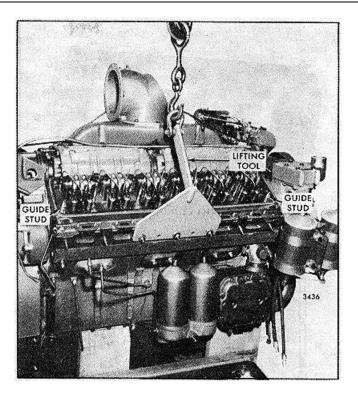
Removing or Installing Cylinder Head with Tool J 22062-01
